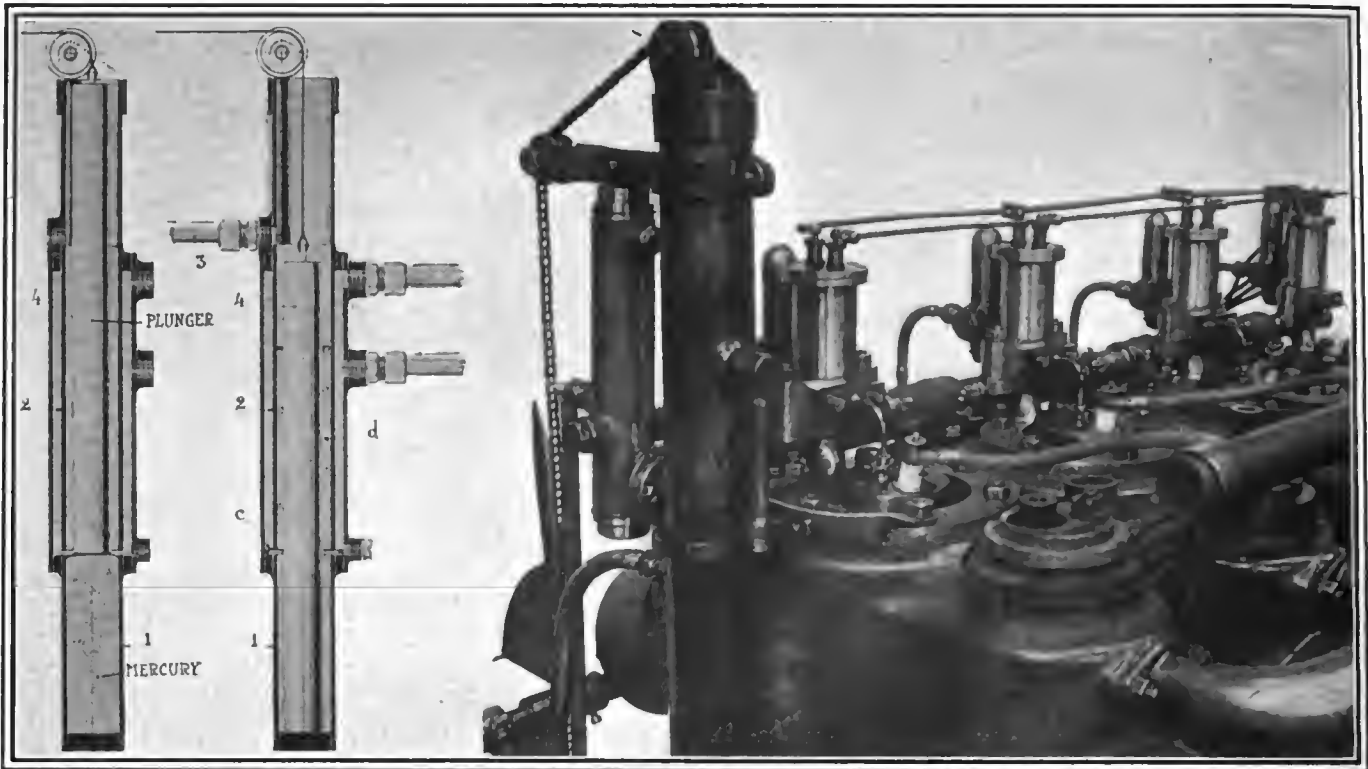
Left, details of fuel-pressure device in Bellem motor. Right, top appearance of motor when fitted with the fuel pulverizing apparatus employed by Bellem
